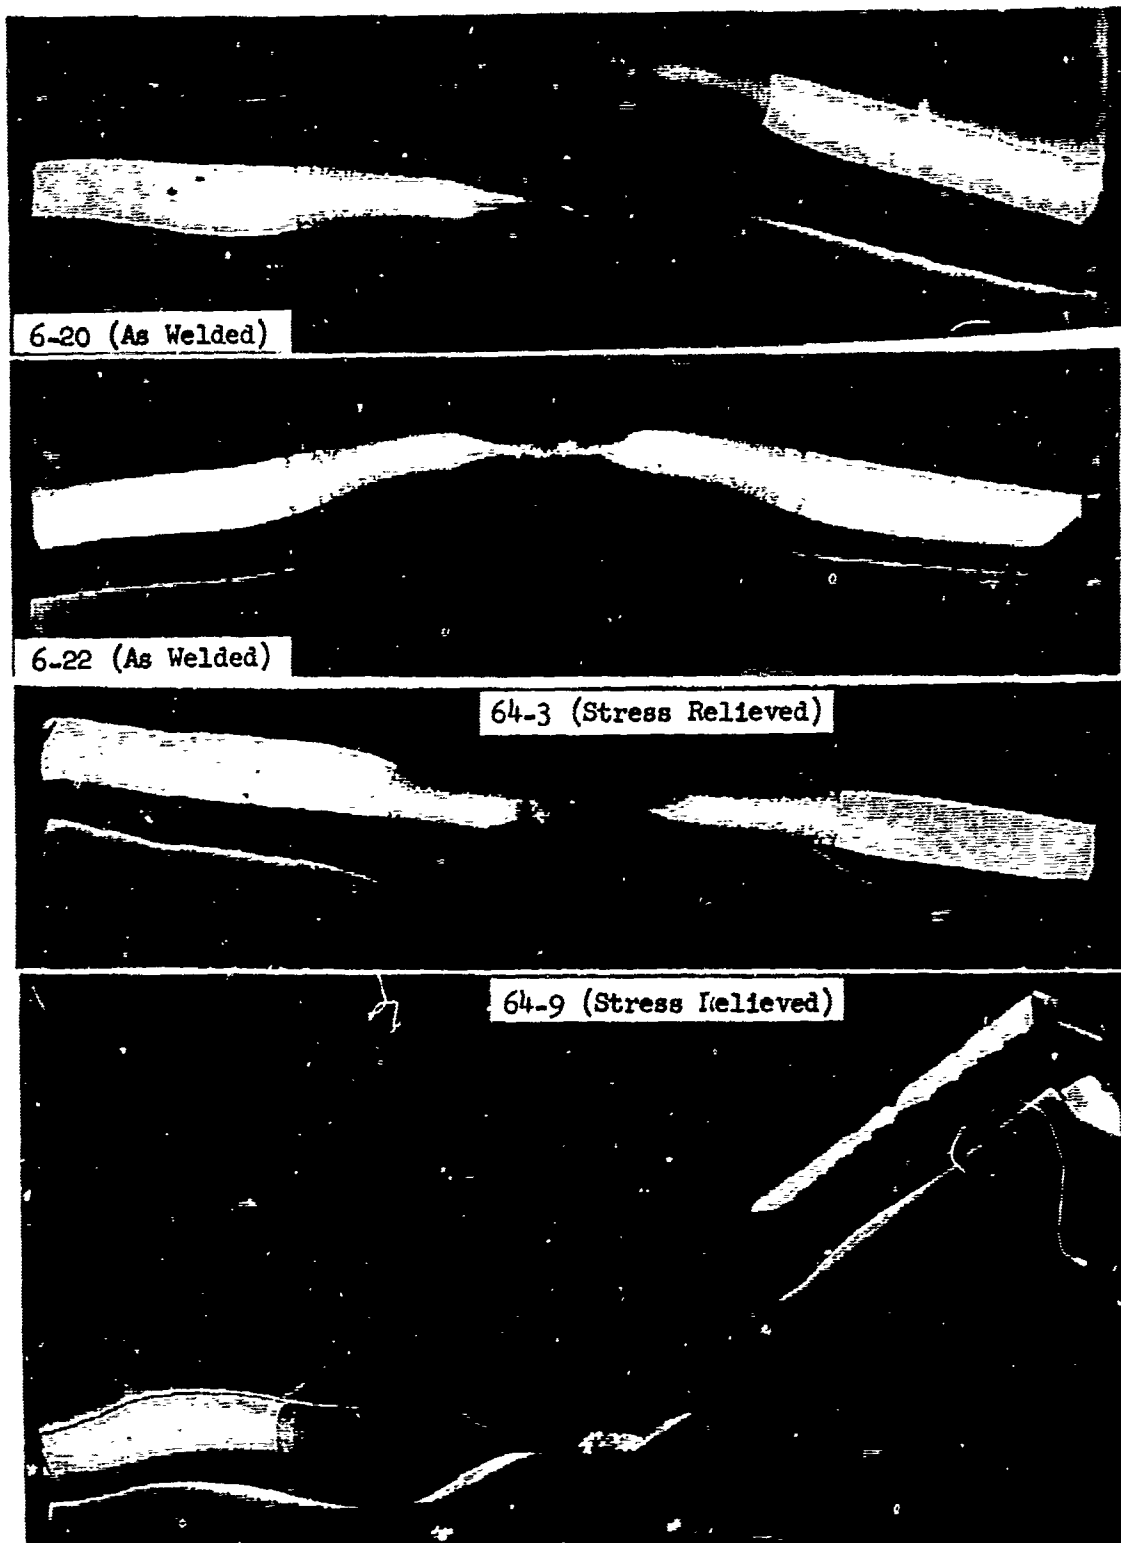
Enlarged View of Fracture Faces of 0.200-Inch
